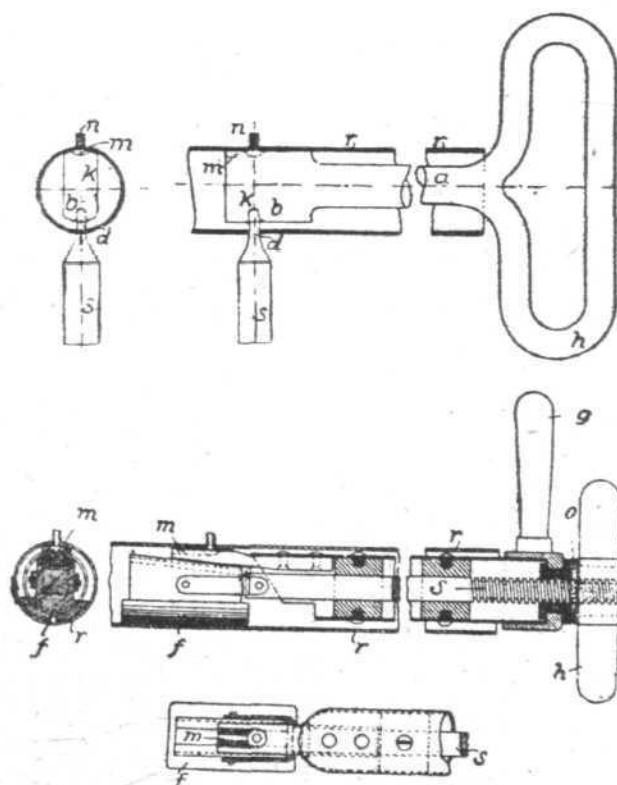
show such a contrivance for fixing rivets. It consists of a head *c*, tubular in shape, and of a width corresponding to the diameter of the tube to be riveted, which is pushed forward to the required position for the rivet by a rod, which is also tubular. A forked slot between the lugs *ll* permits of the adjustment of the tool on to a mandrel passed through the rivet hole. A pusher *S* is fitted in the
